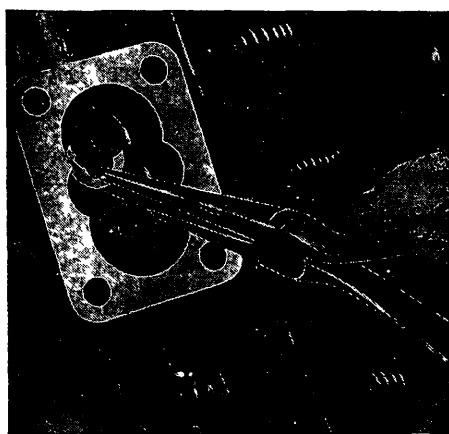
Removing C washer to disassemble Champion oil pump, 1939-52
